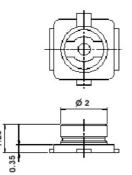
Mechanical dimensions of U.FL-R-SMT connector with U.FL-LP-040 plug
